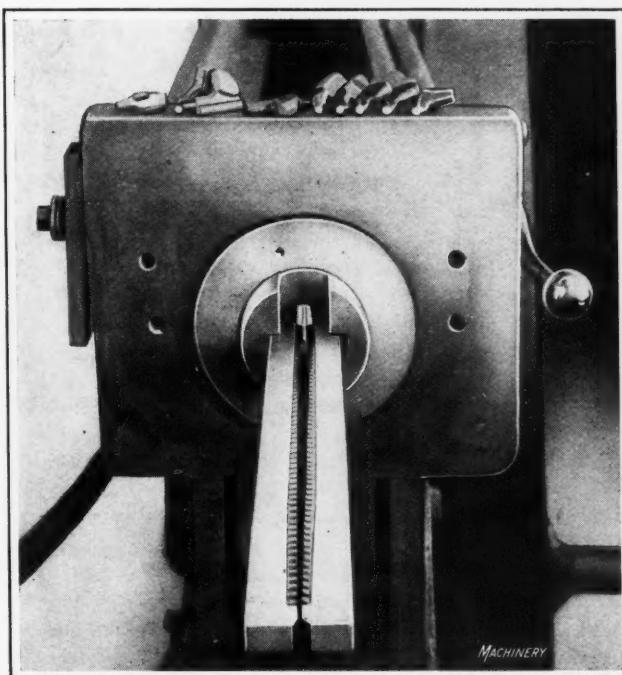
Broaching Machine with Jaw in Place, before Beginning of Cut
